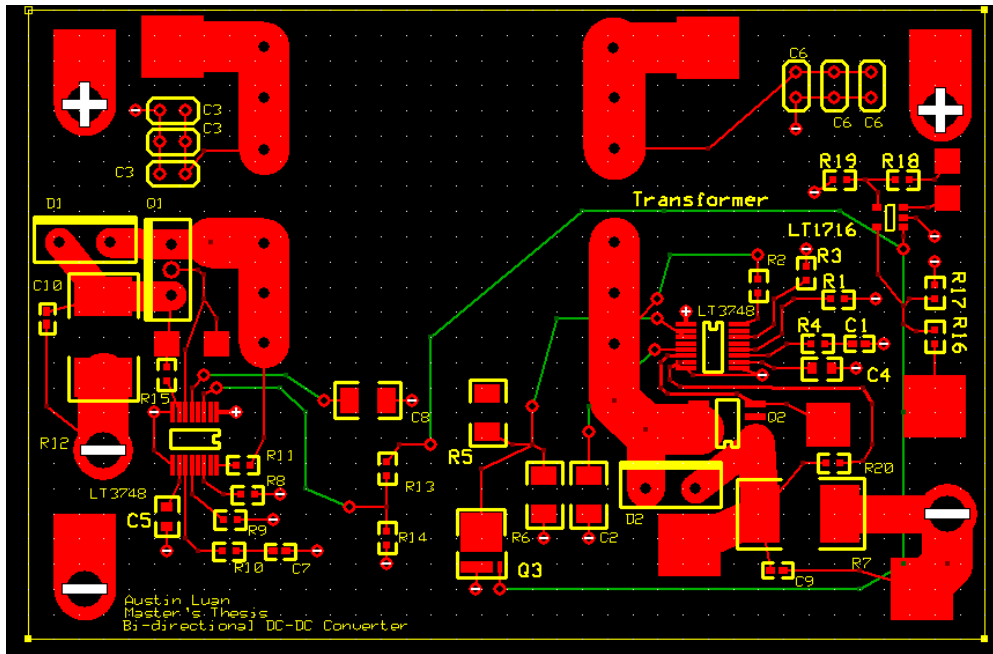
Top Layer with Silkscreen and Bottom Layer of PCB
